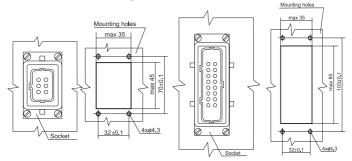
Mounting way of the plug-in socket on the injection mould for the SR11-11X1 system including 1 BR11 controller (on the left) or SR11-3XX1X including 2 or 3 BR11controllers (on the right).
